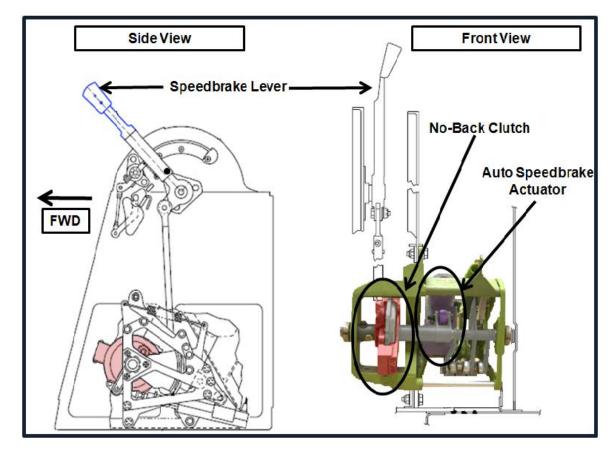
Two diagrams showing the cockpit center console, the speedbrake lever and its linkages, and components of the automatic speedbrake system. The no-back clutch mechanism has been highlighted in the side view diagram on the left. A photograph of the speedbrake actuator and no-back clutch mechanisms has been superimposed on the front view to show those components' relative positions within the center console.
